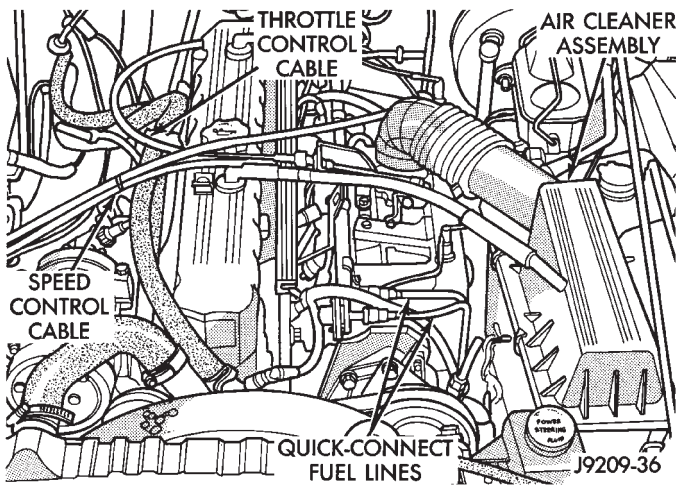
Fuel Line Quick-Connect Couplings, Air Cleaner Assembly, Throttle & Speed Control Cables
